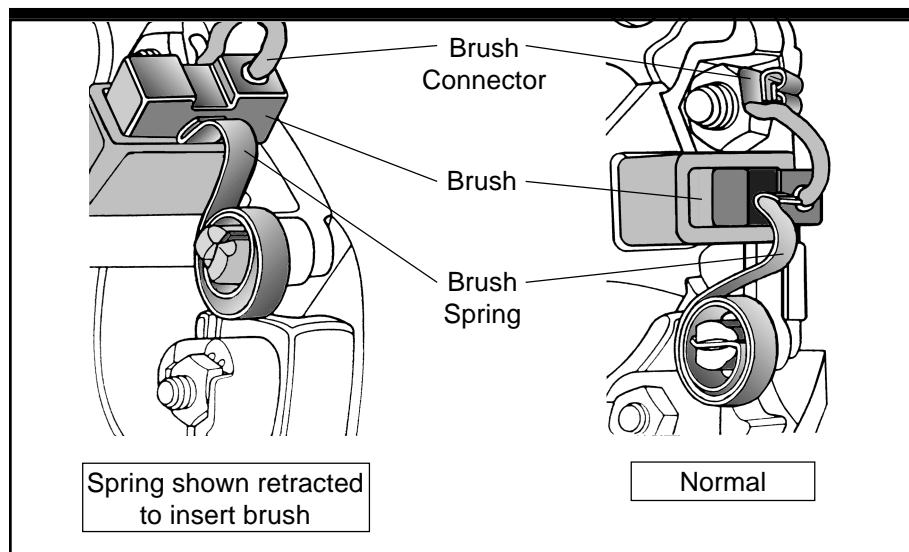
DC Motor Brushes (Gasketed Cover Removed)
